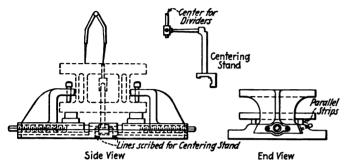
Boring Mill Chuck for Holding Driving Boxes
